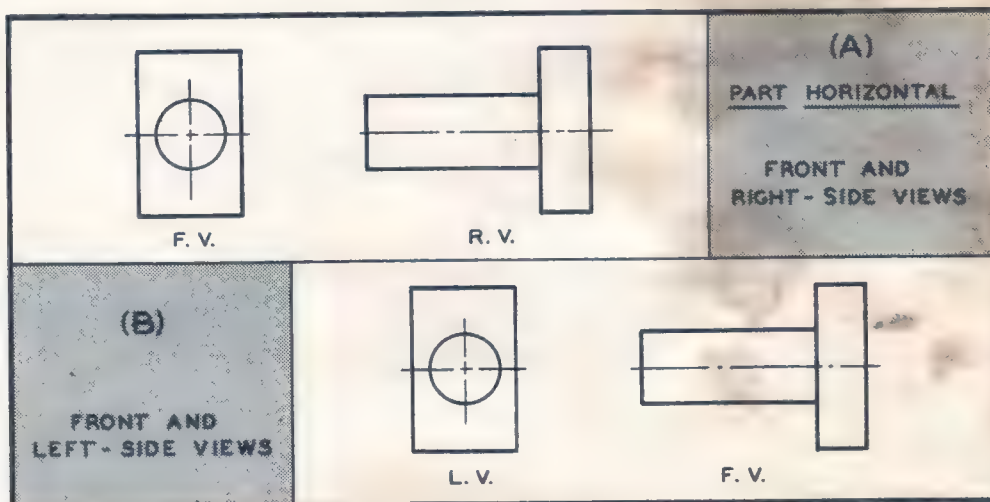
EXAMPLES OF TWO-VIEW DRAWINGS OF A PLUG
